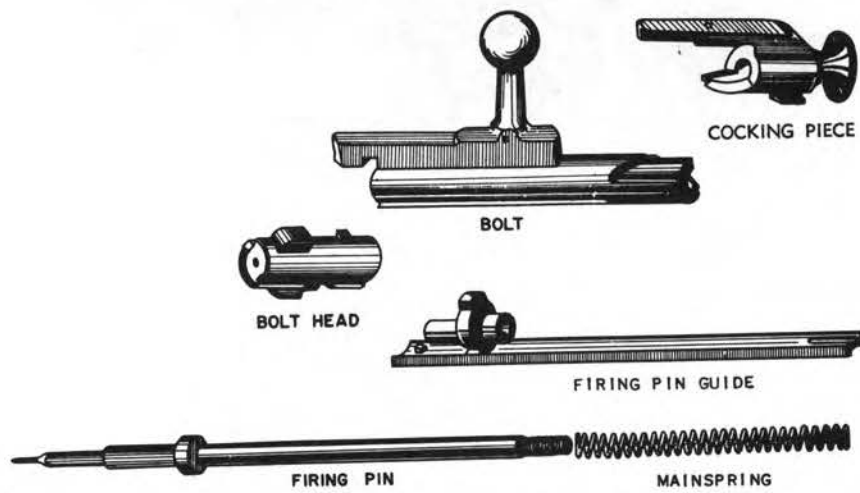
BOLT ASSEMBLY COMPONENTS.
